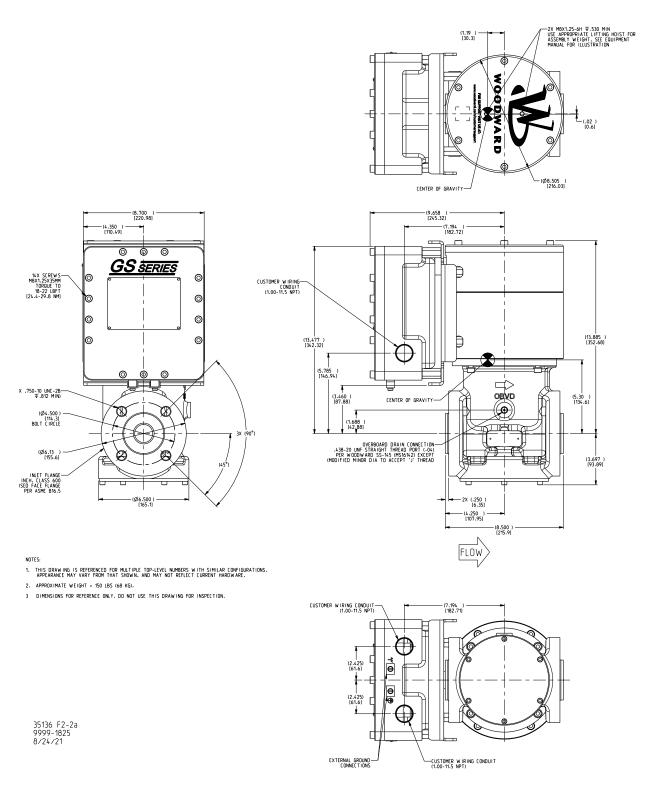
Outline Drawing Stainless Steel GS40 with Conduit Entries
